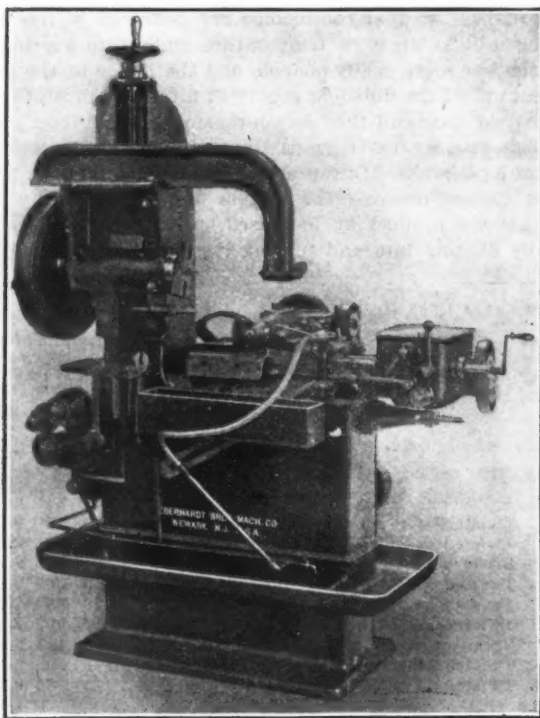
The No. 2B Gear Cutter Built by the Eberhardt Brothers Machine Company, Newark, N. J.
